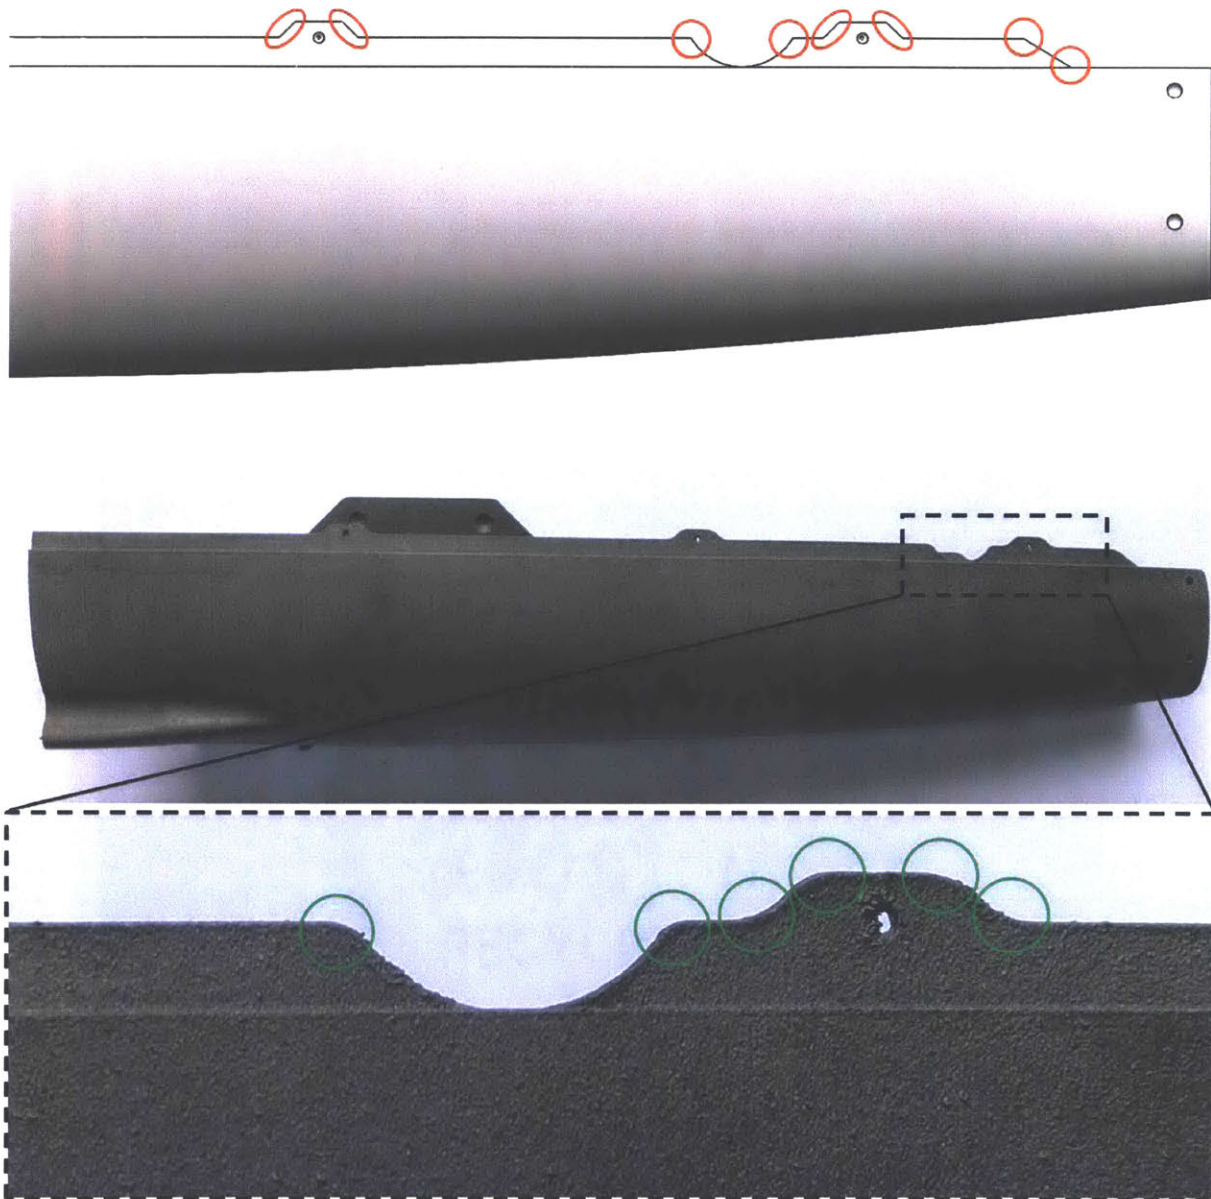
The fairing attachment tabs were filleted. Top: the original design had corners which were unacceptably sharp for printing, marked in red. Bottom: the printed part has filleted corners, marked in green.
